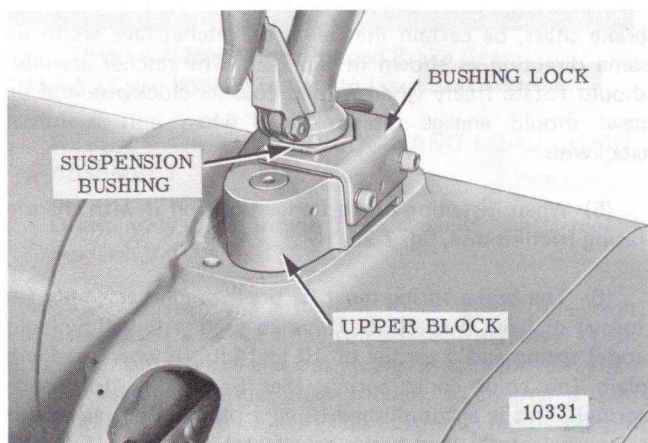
View of Upper Hook Assembled To Hoist Frame (2 Ton Models)
